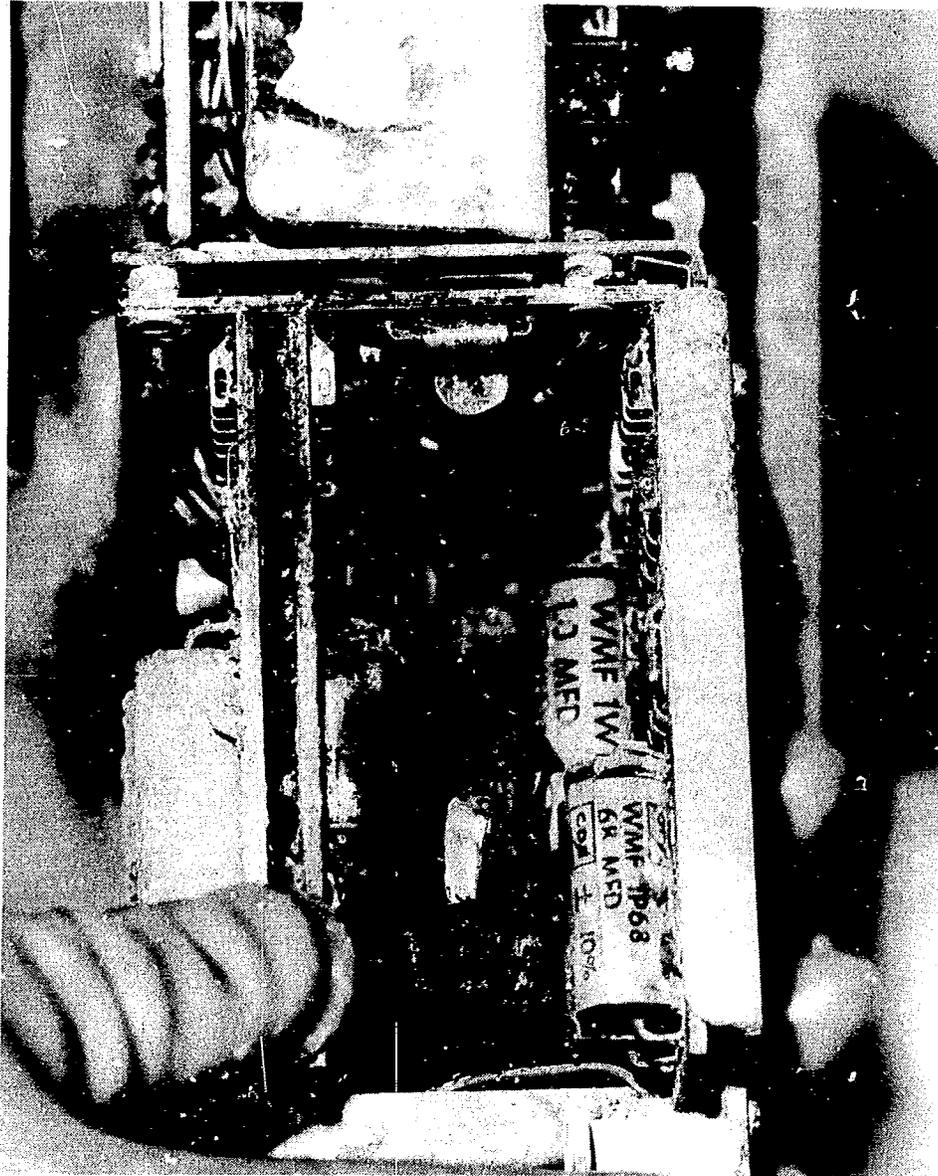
Photograph, Bailey pressure transmitter, circuit board, side view.
